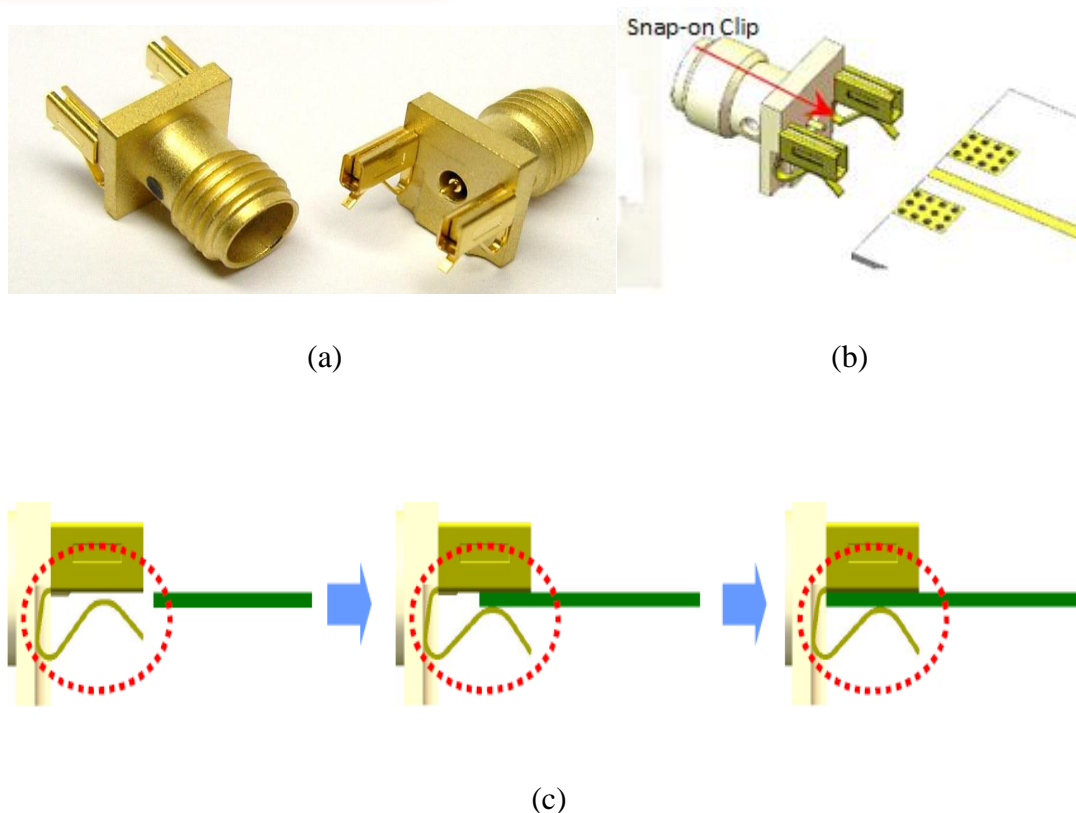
(a) Isometric view of the quick end launchers and (b) illustration of the snap on clip that provides tension to hold the connector to a pcb (c) demonstration of ease of mounting onto a pcb [11].
